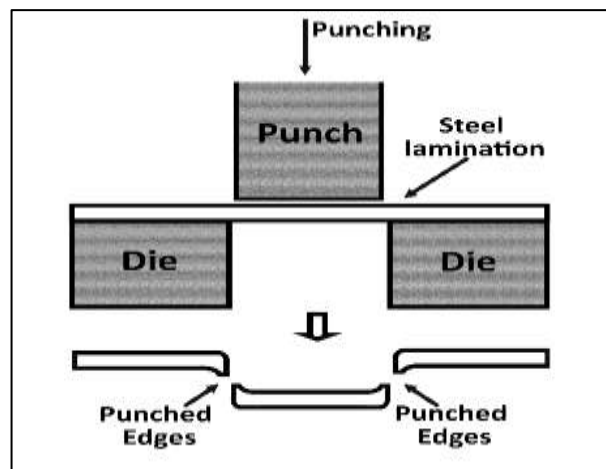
Diagram illustration of designing the sheet metal by punching, signifying the formation of burr near the punched edges [20].
